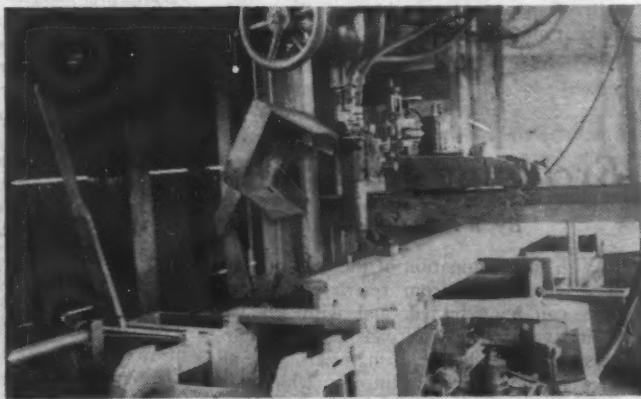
Oxyacetylene Cutting Machine Used for Reclaiming Rail
